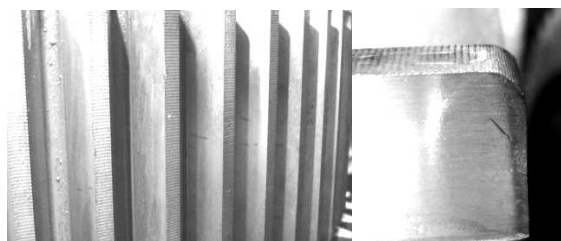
Cracks on the working surface of the cog occurs during manufacturing gear
